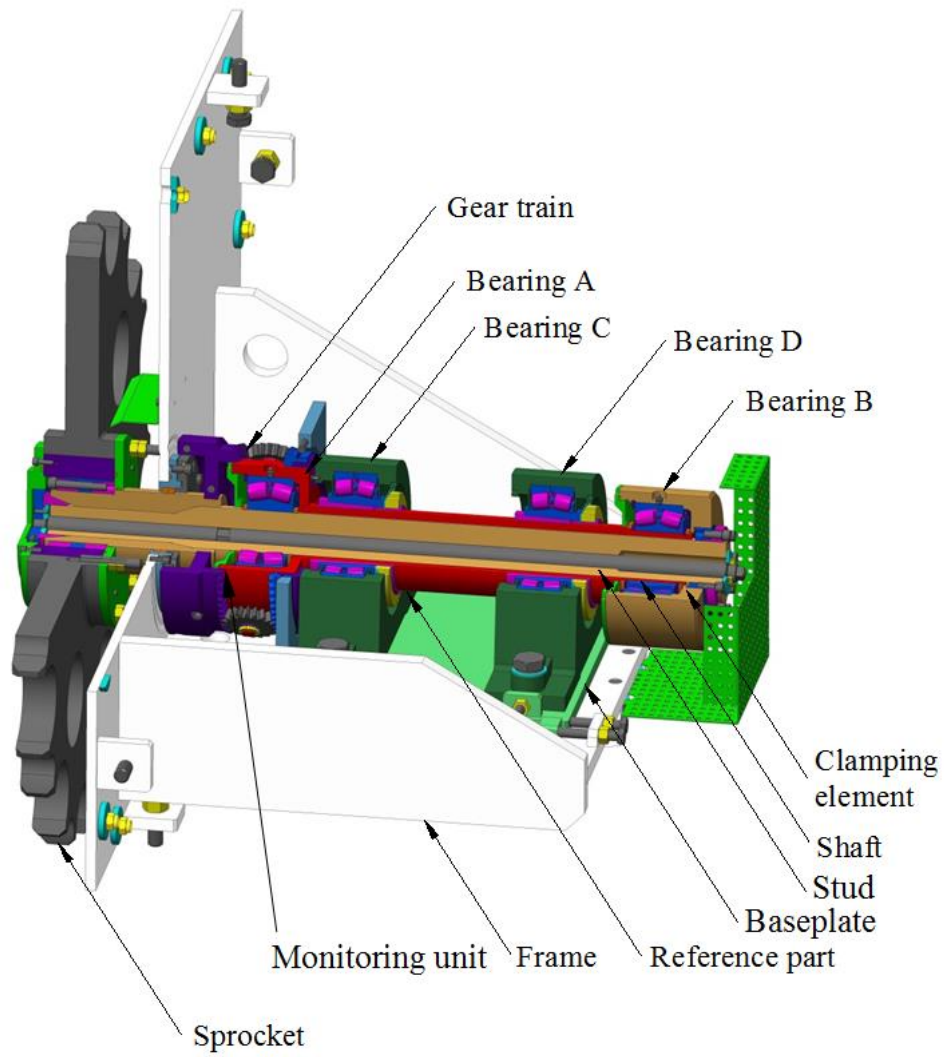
Design of the optimised sprocket shaft bearing assembly including monitoring unit
